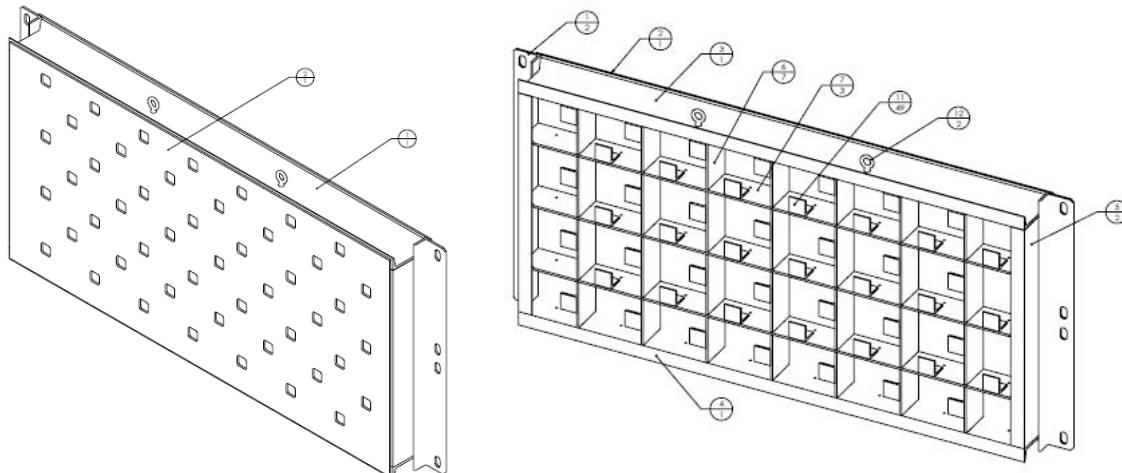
Guam MSM Door Test Panel Fabrication Drawings, with front plate (left) and without (right).
